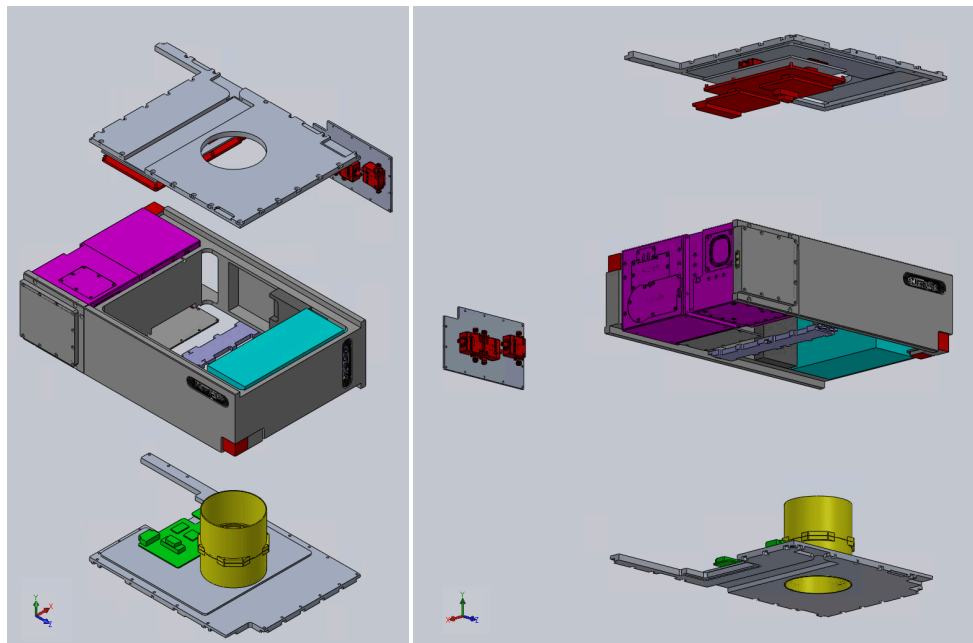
Exploded view of the DSC bottom plate interfacing.
